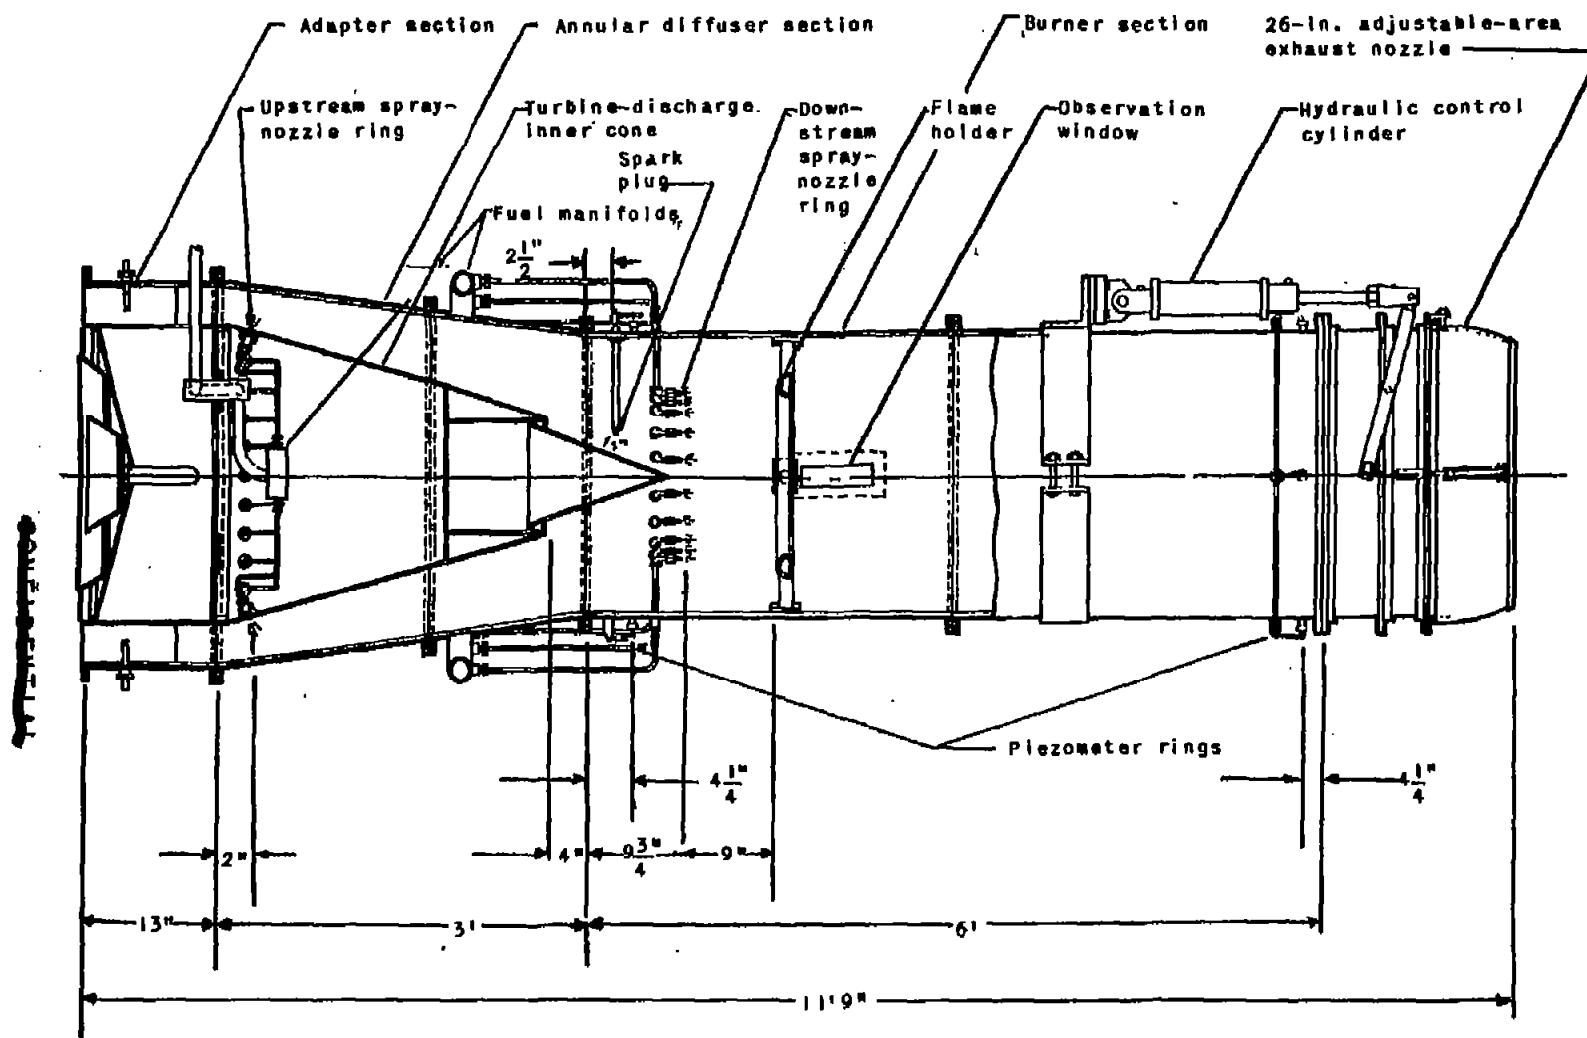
Sketch of tail-pipe burner for turbojet engine.
